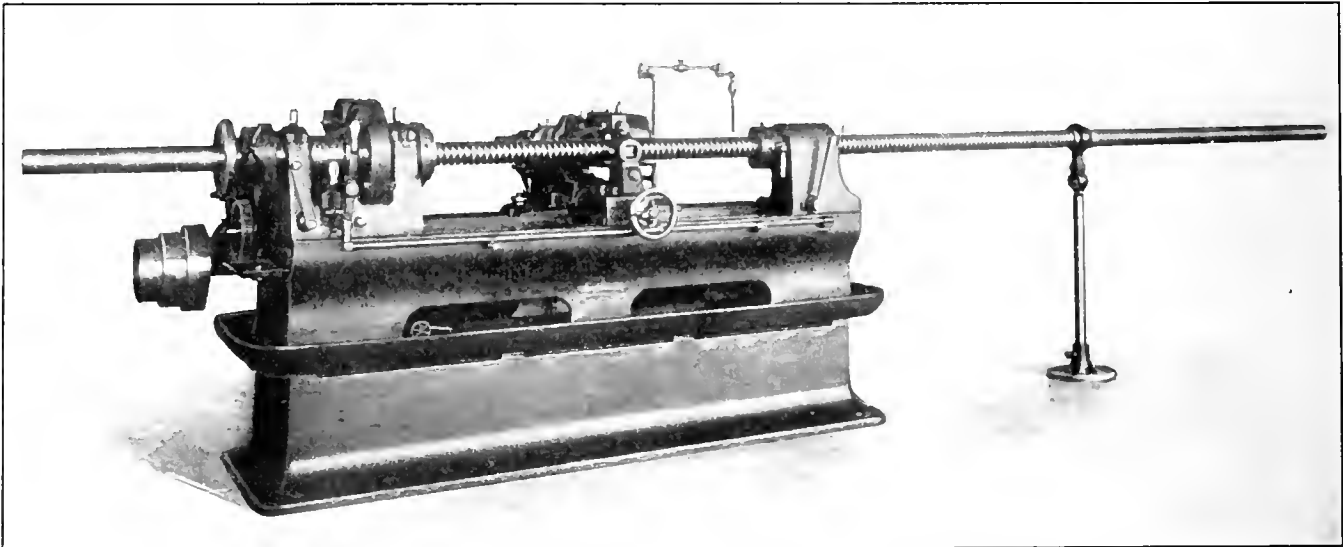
Lead-screw shown in Detail in Fig. 4, cut in a Pratt & Whitney Thread Milling Machine.
